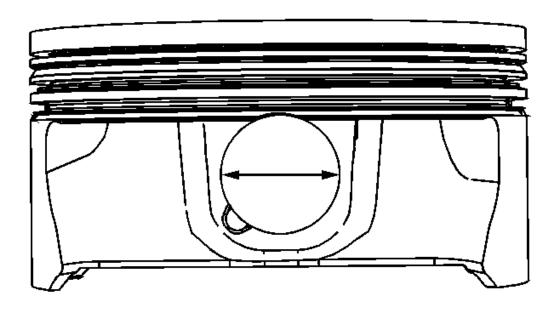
Measuring Piston Pin-To-Bore Clearance Courtesy of GENERAL MOTORS CORP.
